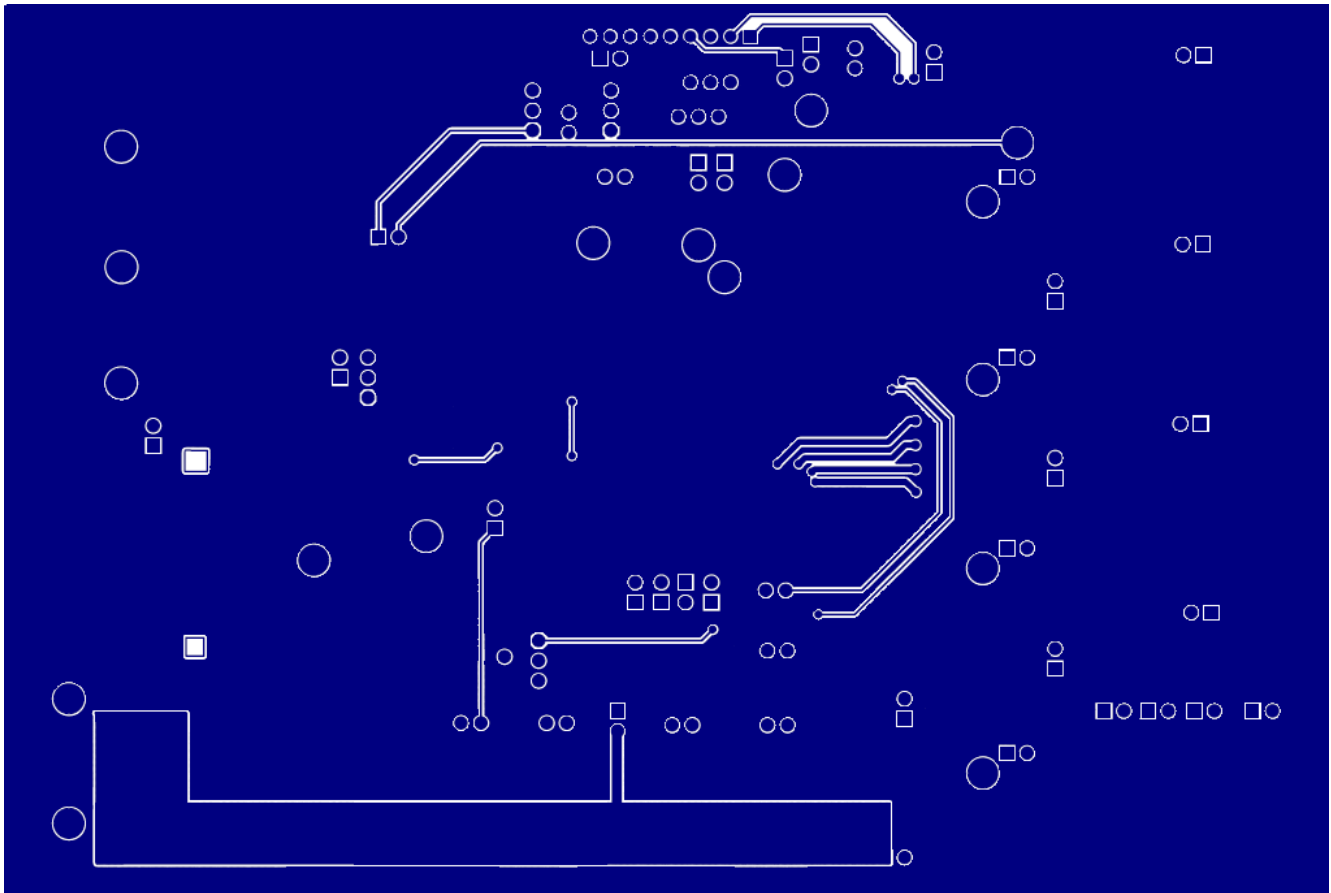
ISL97687 BOTTOM LAYER OF EVALUATION BOARD
